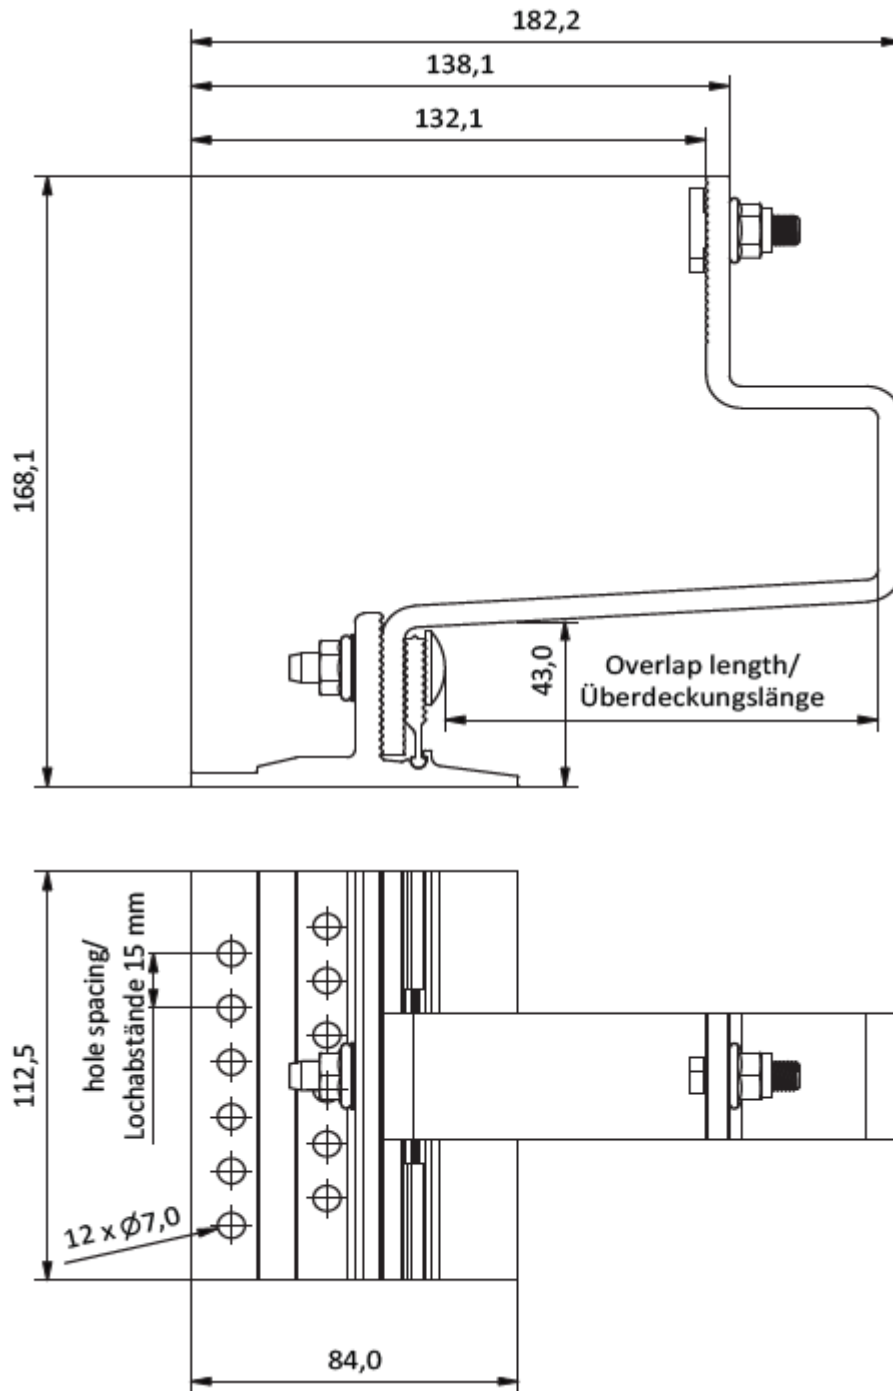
Dimensions in mm of "DH Hybrid 112-7-43 6 mm"
